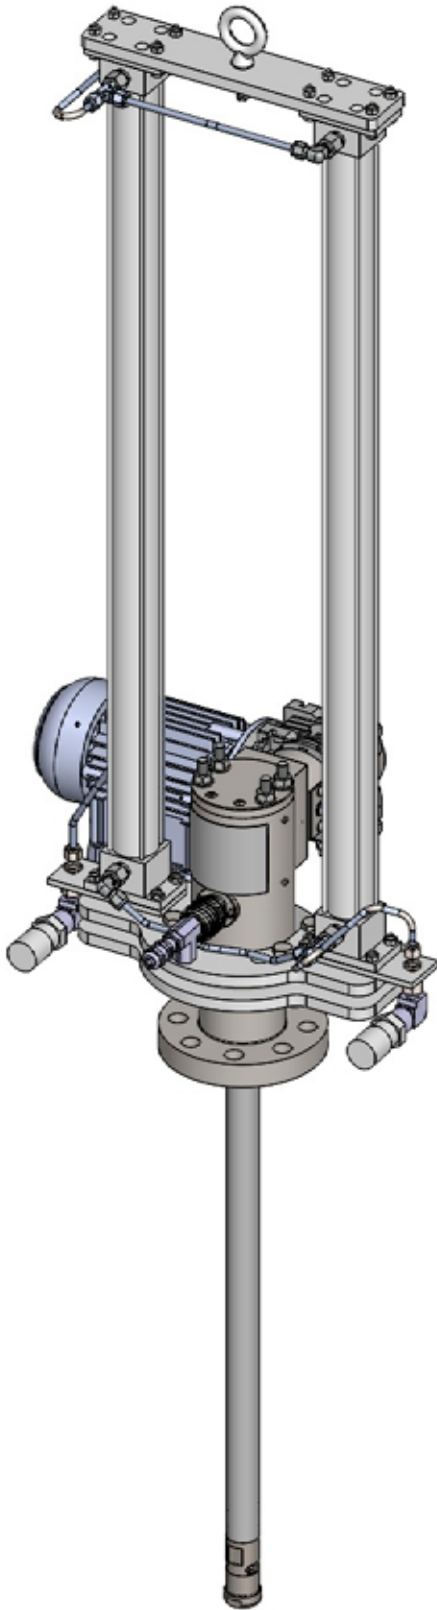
Close up view of ET-100 Insertion Tool mounted to API-PE Sampler
